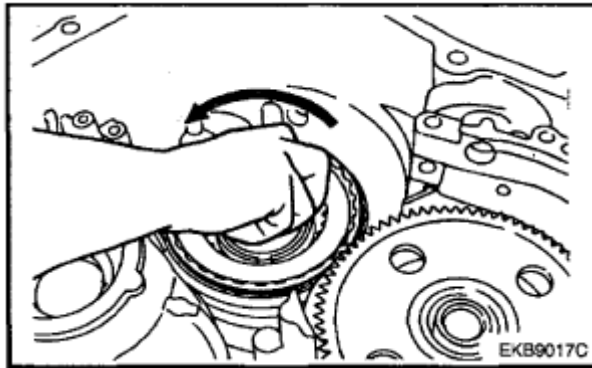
Identifying Reverse Clutch Piston And Overdrive Clutch Piston
